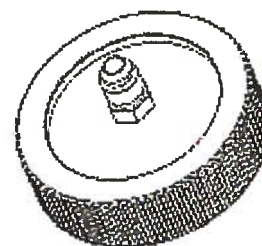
Model PDA-D2 Pneumatic Actuating Adaptor.
